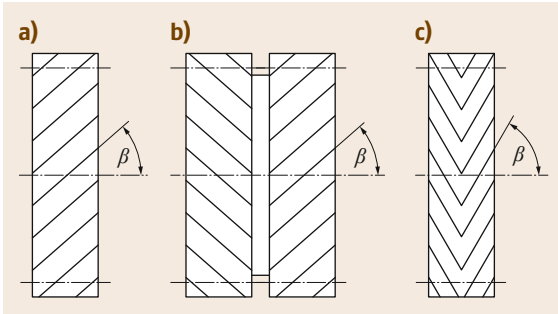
c Helical spur gears: (a) single helical gearing, (b) double helical gearing with recess for tool runout, and (c) herringbone gearing
